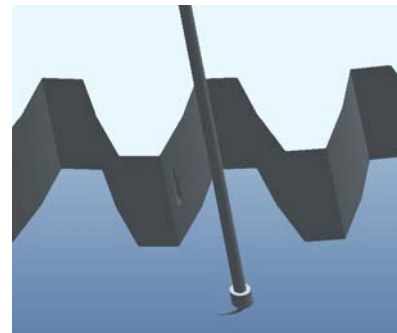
Welding gun moves along X axis longitudinal lead rail straightly.
